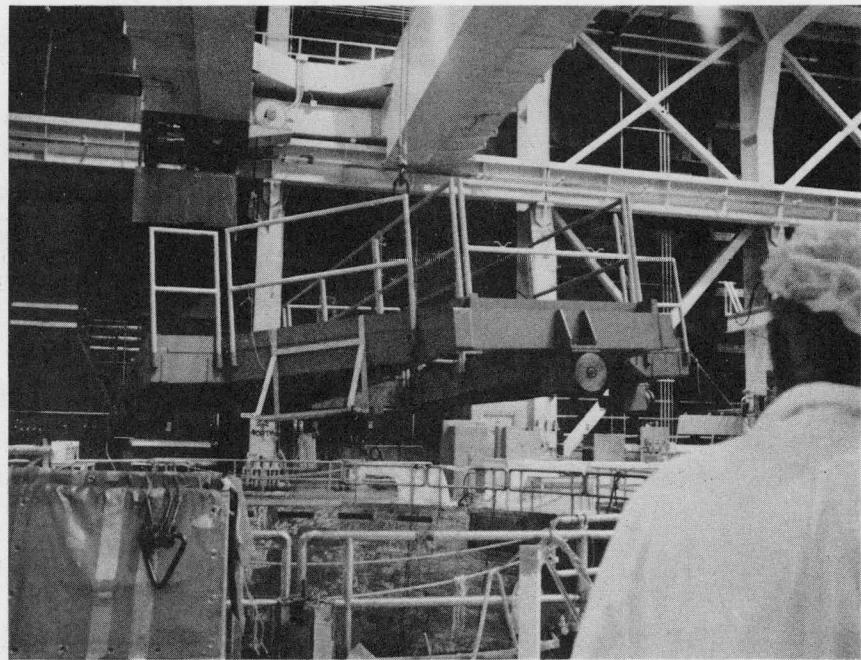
Lower Tie Plate Machining (Browns Ferry)
